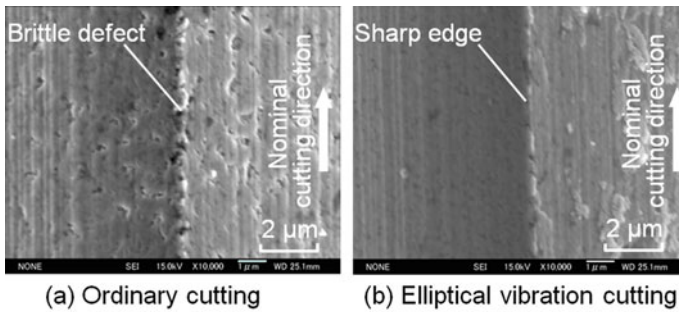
V-grooved surface with sharp edge fabricated by elliptical vibration cutting [36]
